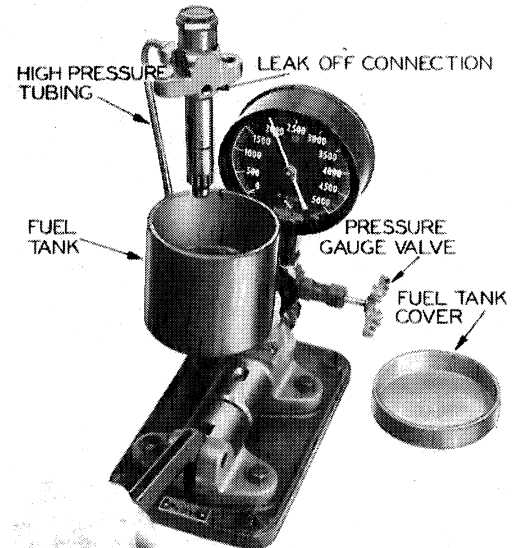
Checking the Fuel Injector with the TSE 7722D Nozzle Test Stand
